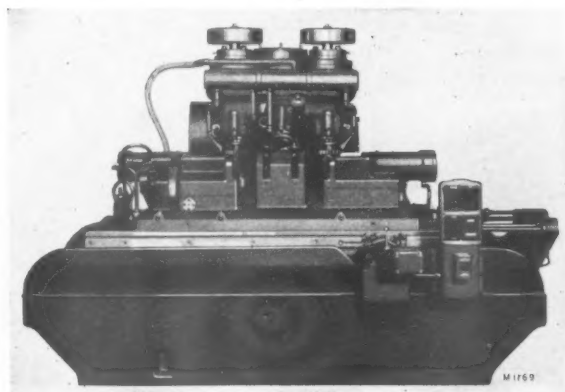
Hydraulic Rigidmil with automatic operating cycle and fixture for milling crankshafts. Sundstrand-designed and built throughout including hydraulic equipment.
